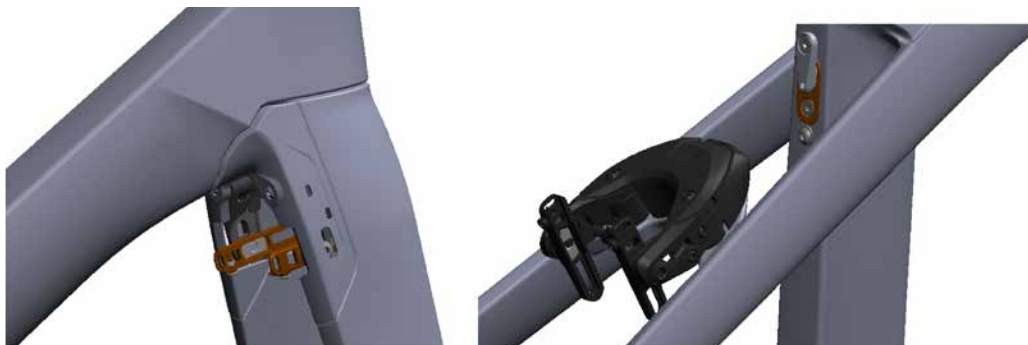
New Madone Front Rim Brake & Rear Rim Brake CAD Models, assembled to frame to show form factor
